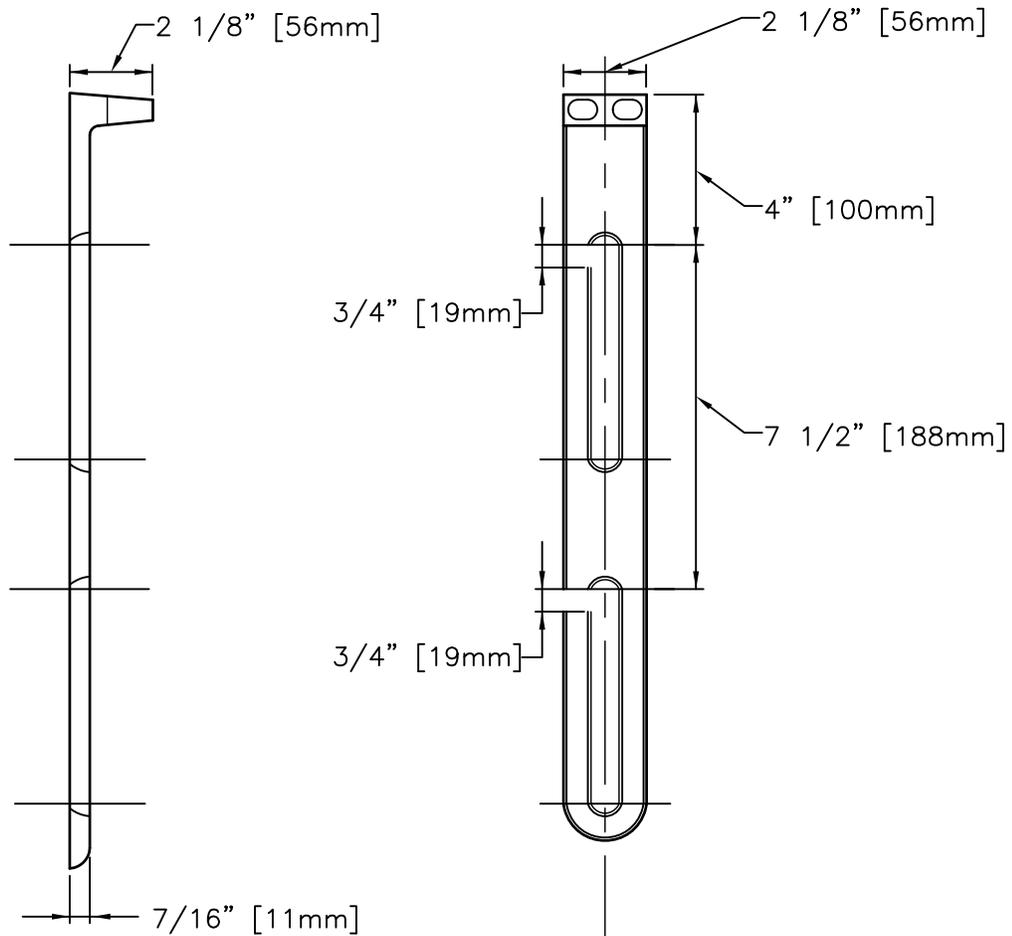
DETAIL TITLE / LAVATORY MOUNTING DETAIL
